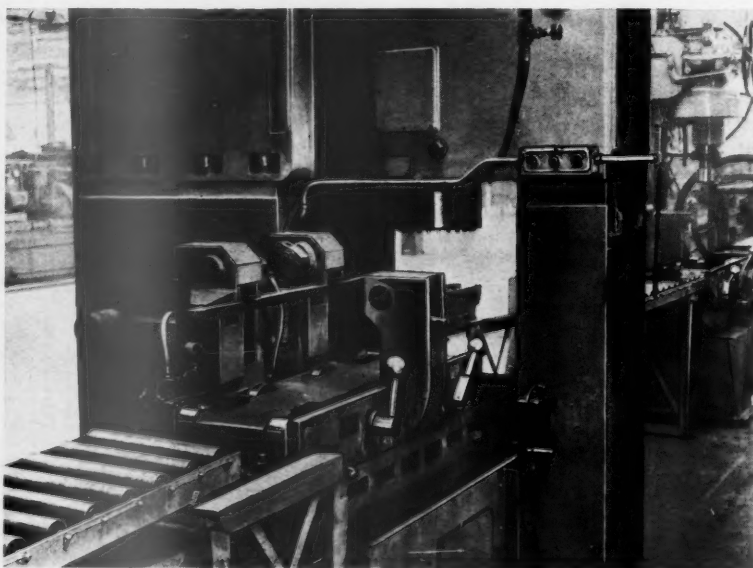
The work-holding fixture and cutter for finish machining the cylinder head joint face on an Archdale miller.
